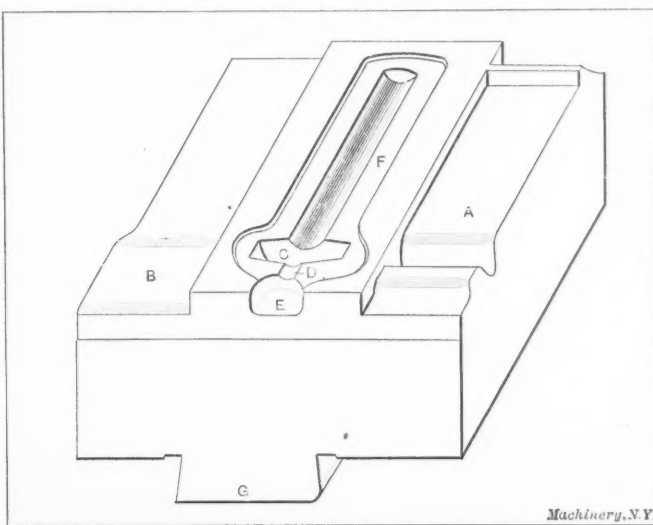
The Lower Die of a Pair of Drop-forging Dies
